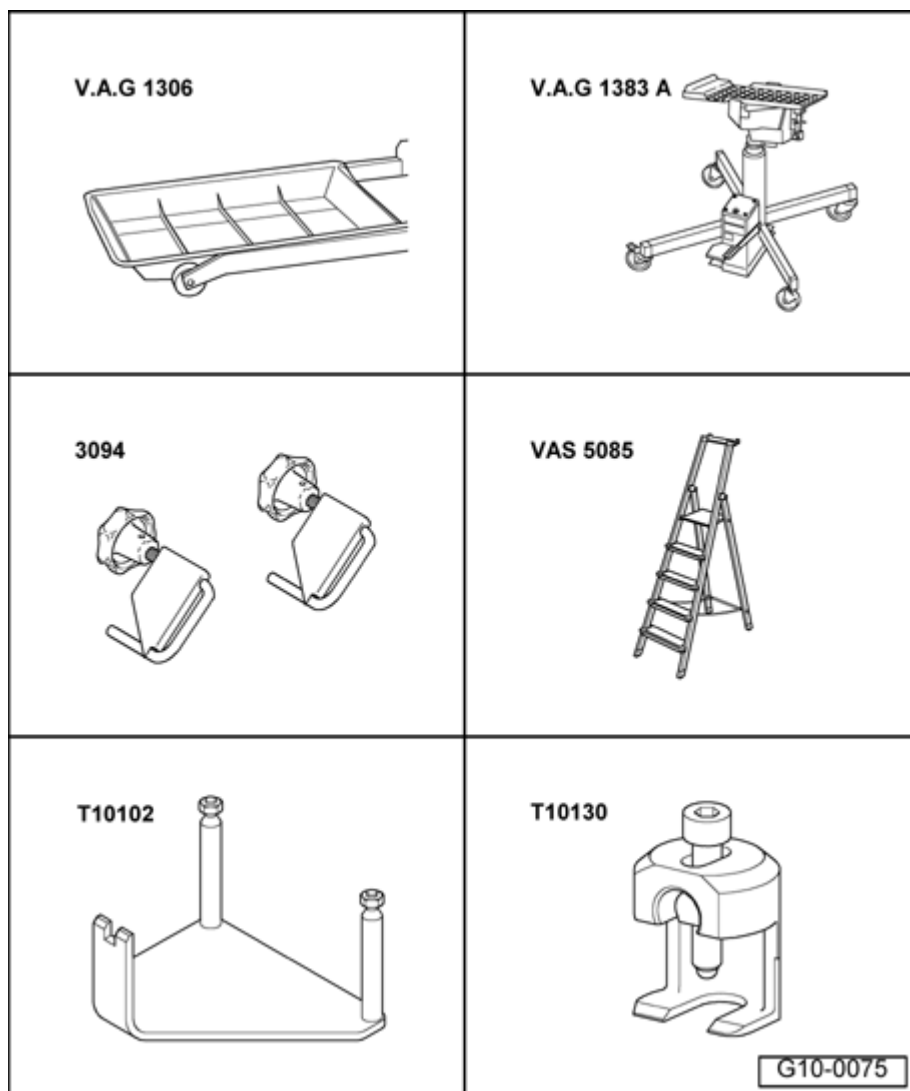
Identifying Special Tools - Engine, Removing And Installing
